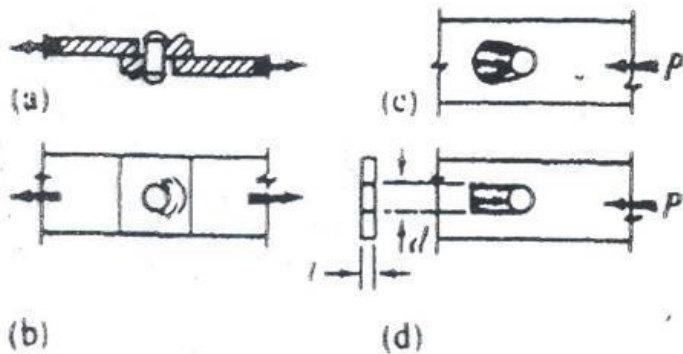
A bearing failure of a riveted joint and bearing stress distributions, (c) probably, (d) assumed
